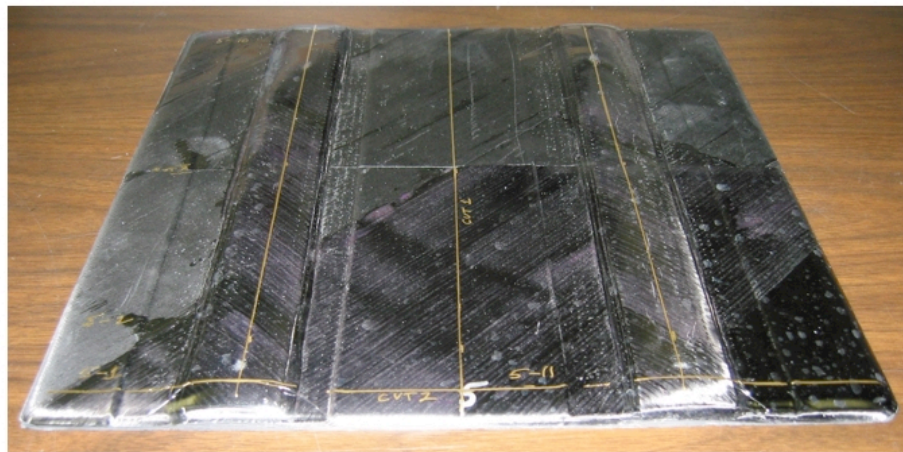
Skin/stringer flange panel with self-healing material only in three plies on either side of flange-to-skin bond line
